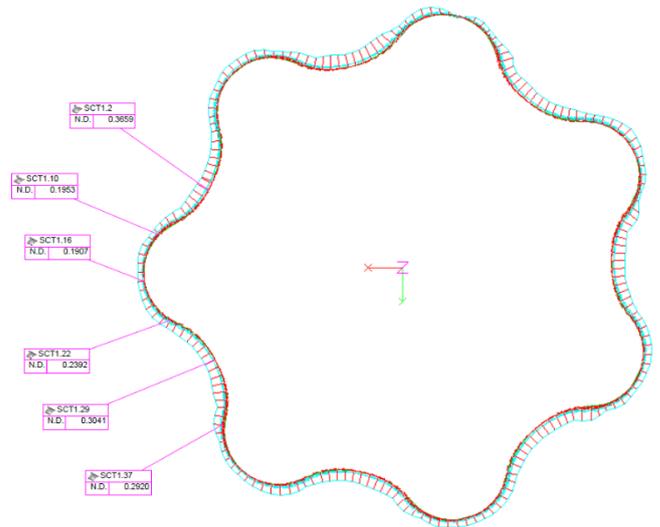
The results of measurements of the laboratory rotor sample profile after spraying and further melting by a laser machine using a robot manipulator.
